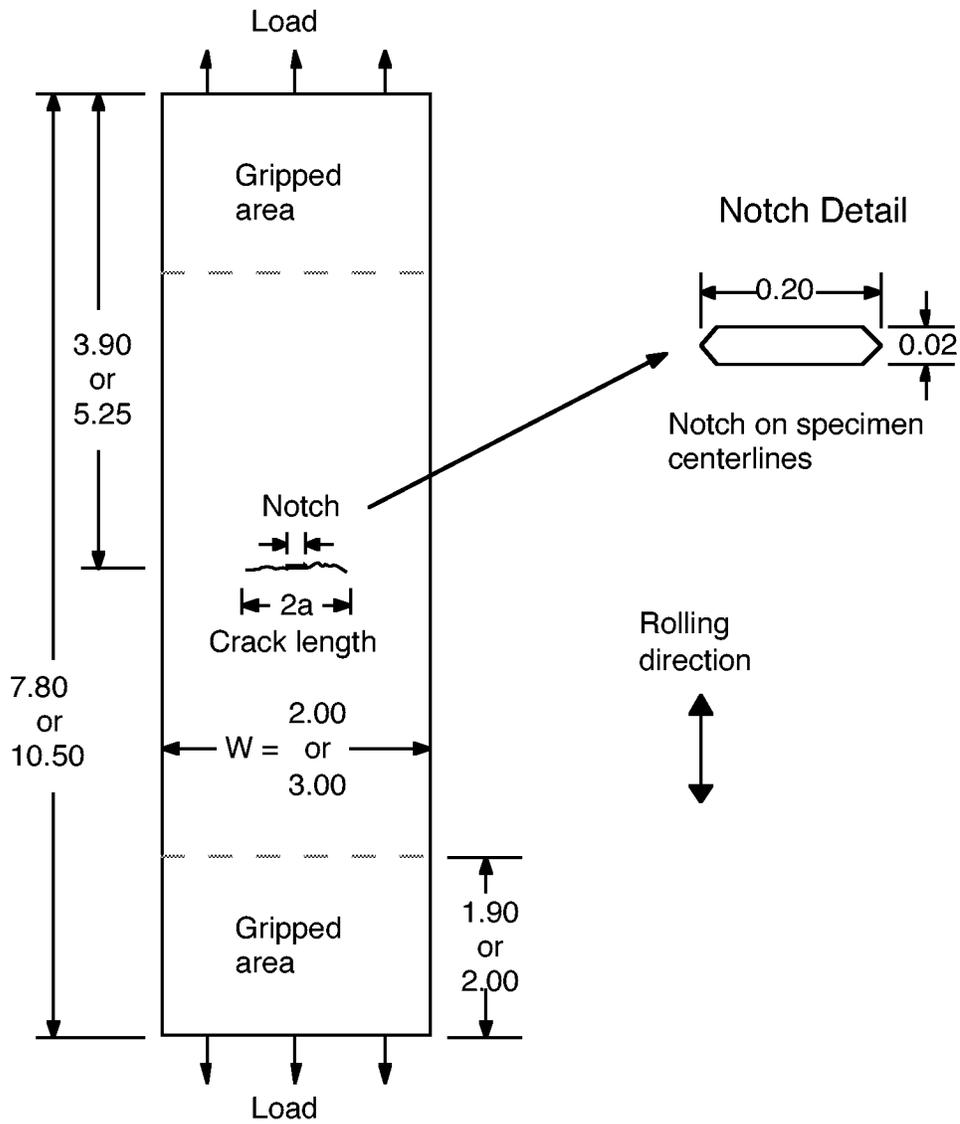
Specimen configurations. Smaller dimensions refer to 2.00-in.-wide specimen. (Dimensions in inches.)
